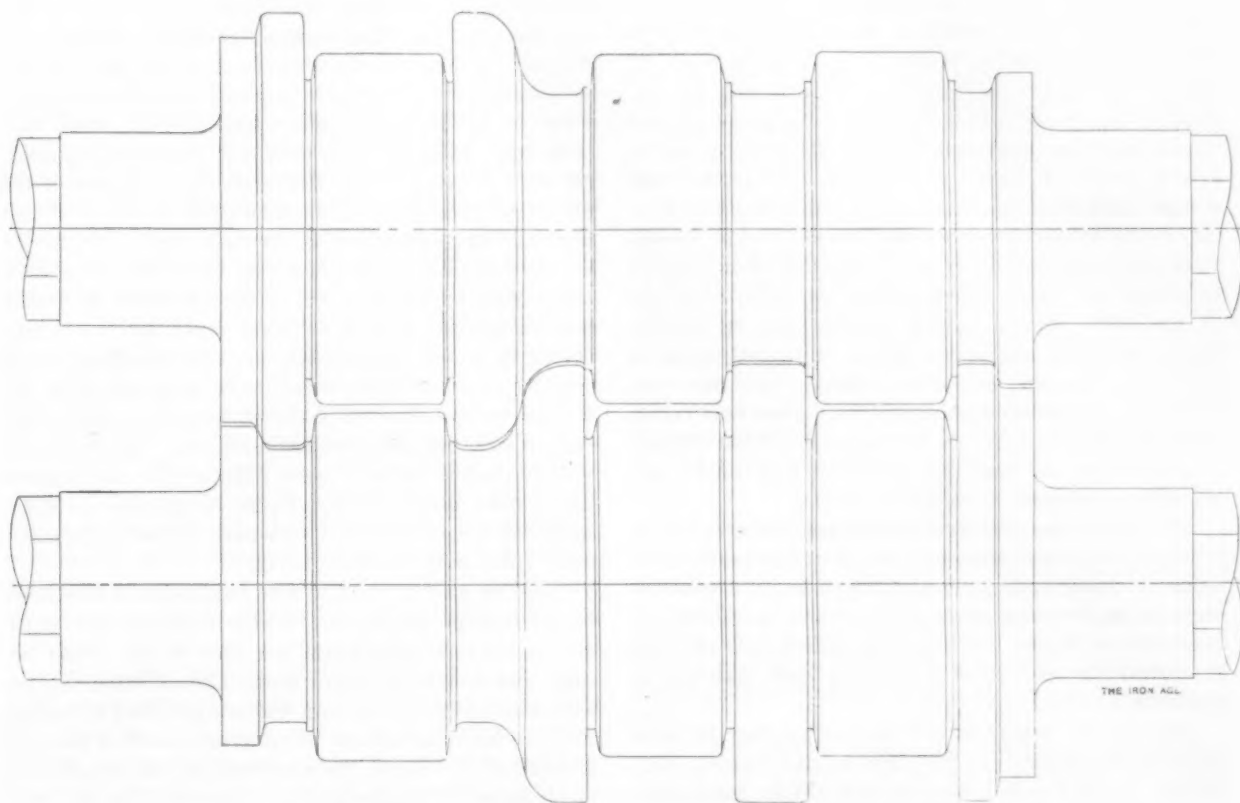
Rolling Beams in a Rail Mill.—Scale, $\frac{3}{4}$ Inch to 1 Foot
